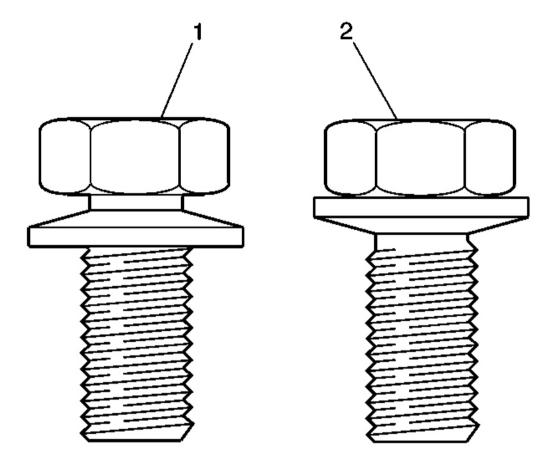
Oil Pan Bolts & Conical Washers Courtesy of GENERAL MOTORS CORP.
